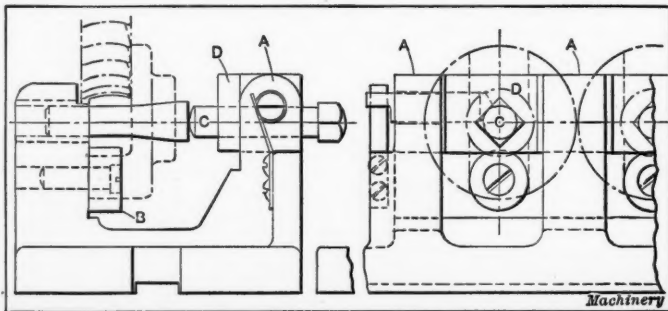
Milling Fixture used for Milling Tongue in Coupling in Fig. 3
